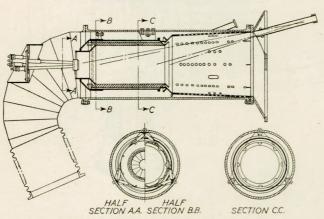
Details of lowered combustion chamber fitted in E.L.60A
